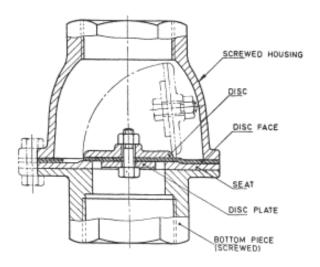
A TYPICAL SECTIONAL DRAWING OF SCREWED REFLUX VALVE TO BE USED IN SUCTION LINE OF AGRICULTURAL PUMP
